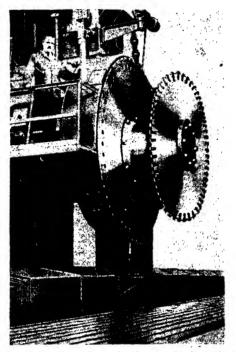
The same machine with a circular saw at the end of the spindle.
